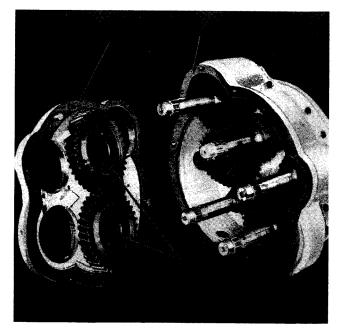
Bearing Set Removed from Sleeve Gear and Retainer Pull the bearings from the sleeve gear hubs (Fig. G-19). Keep the bearing cones, cup, and spacer together since the four parts make up a matched bearing set. (All tapered roller bearings used in this transmission are used in matched sets. See "Transmission Service" on page G-10 for more detailed information.)
